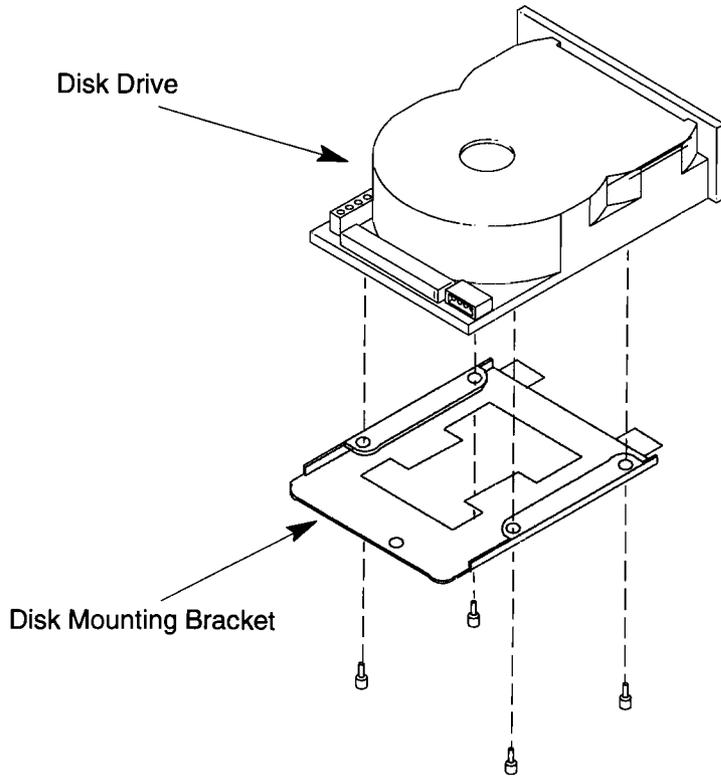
Removing the Disk Drive Mounting Bracket on Quantum and Seagate Drives
